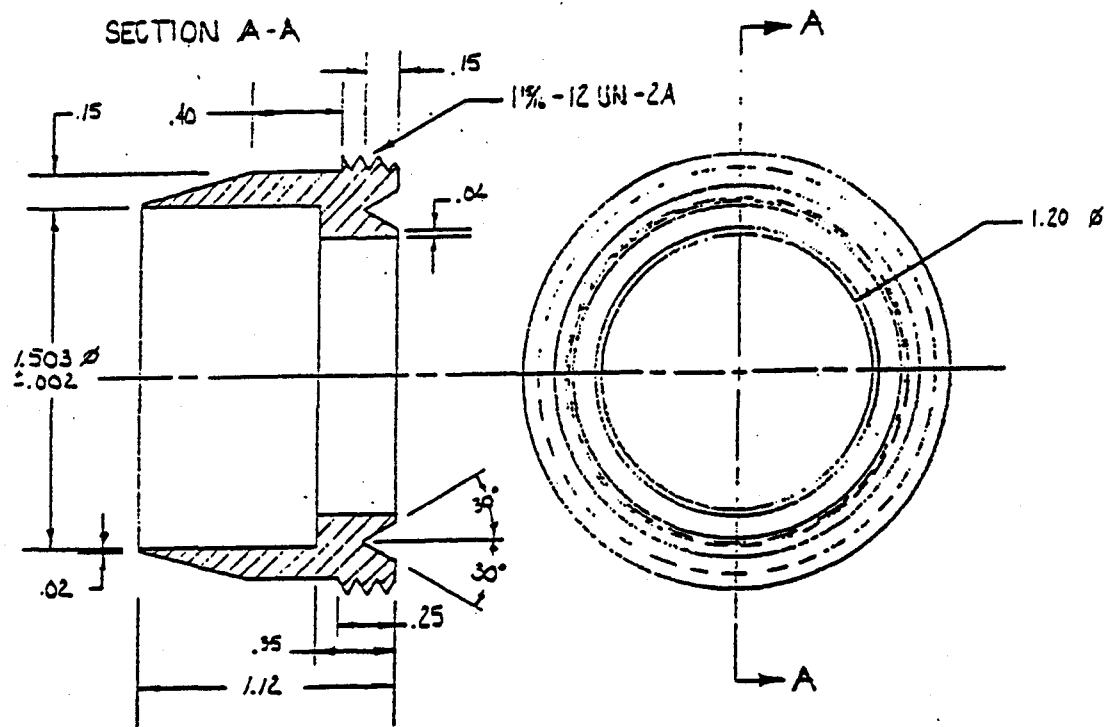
Union Type Connector Part, Threaded Tailpiece.
